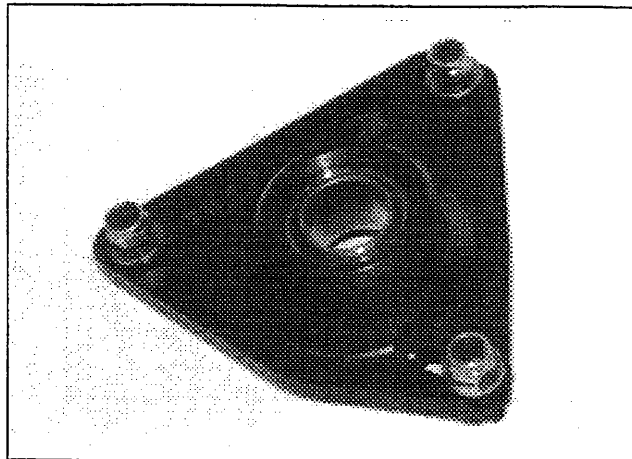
FRONT REINFORCED TOP MOUNT TYPE 2
